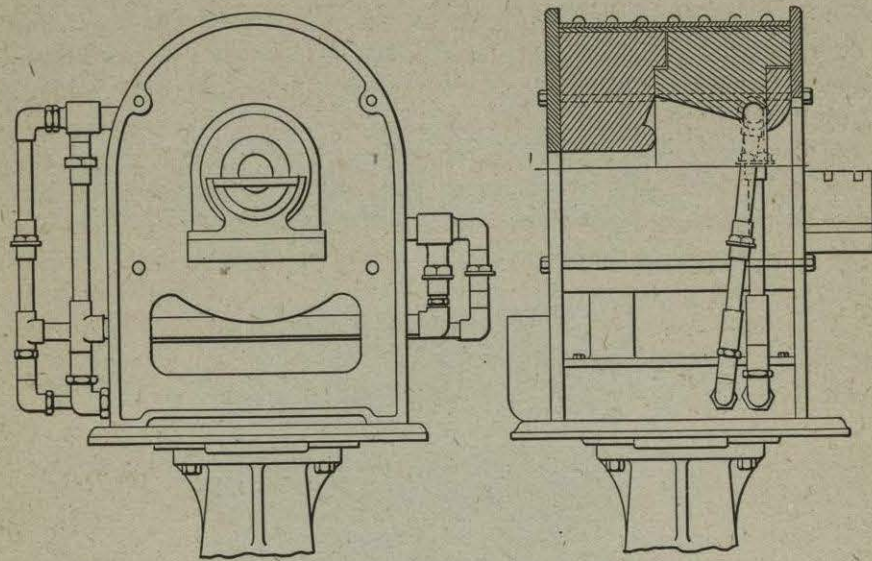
Sectional view of wizard high-speed steel furnace.
